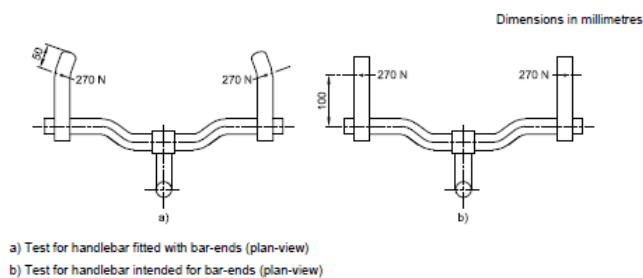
Handlebar incorporating bar-ends – out-of-phase fatigue tests
